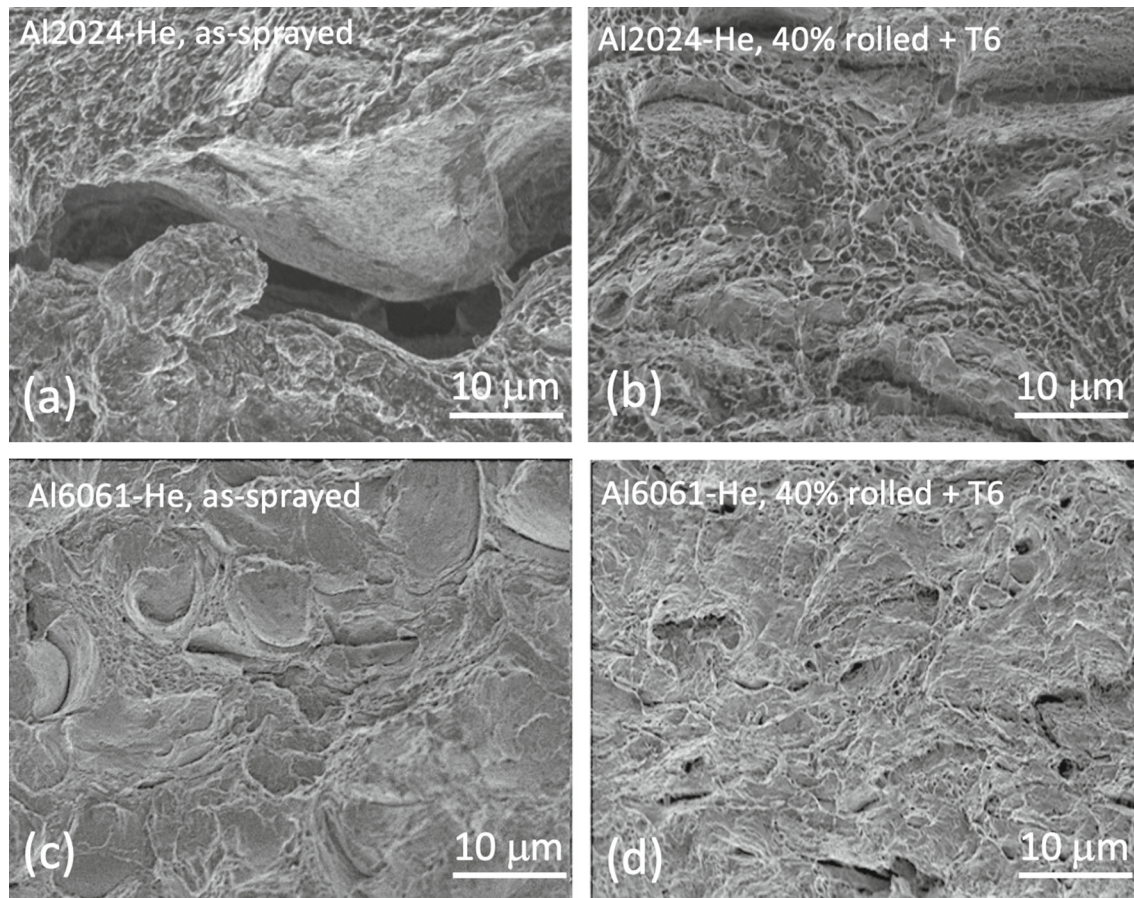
Fracture surfaces of tensile specimens of Al2024-He and Al6061-He. (a) As-sprayed Al2024, (b) 40 pct -rolled and T6 heat-treated Al2024, (c) as-sprayed Al6061, (d) 40 pct -rolled and T6 heat-treated Al6061.
